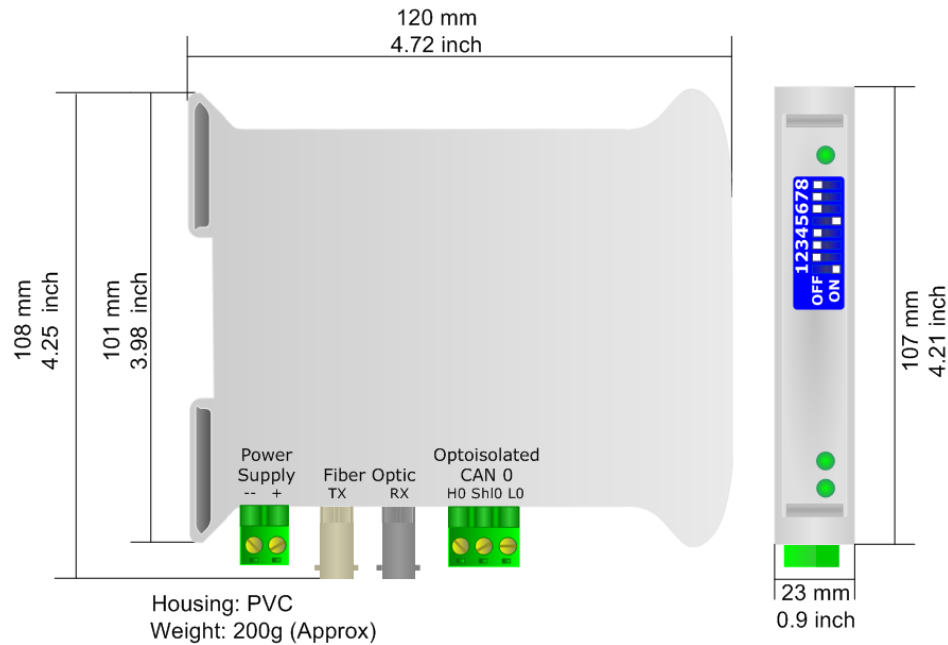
Mechanical Dimensions Scheme for HD67XXXF
